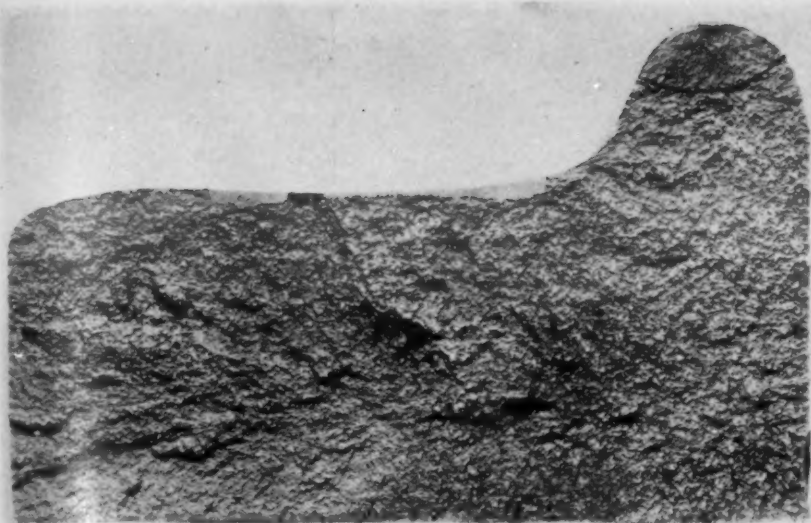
Progressive Tire Fracture Originating in the Flange
